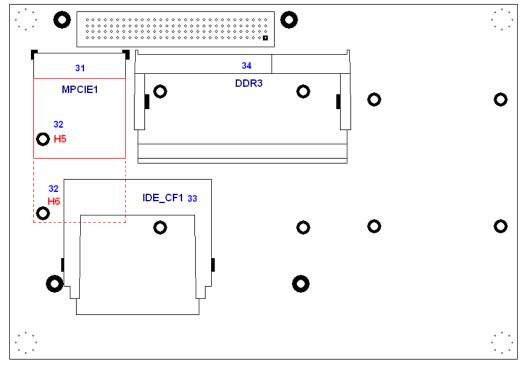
Jumpers and Connectors Location_ Board Bottom
